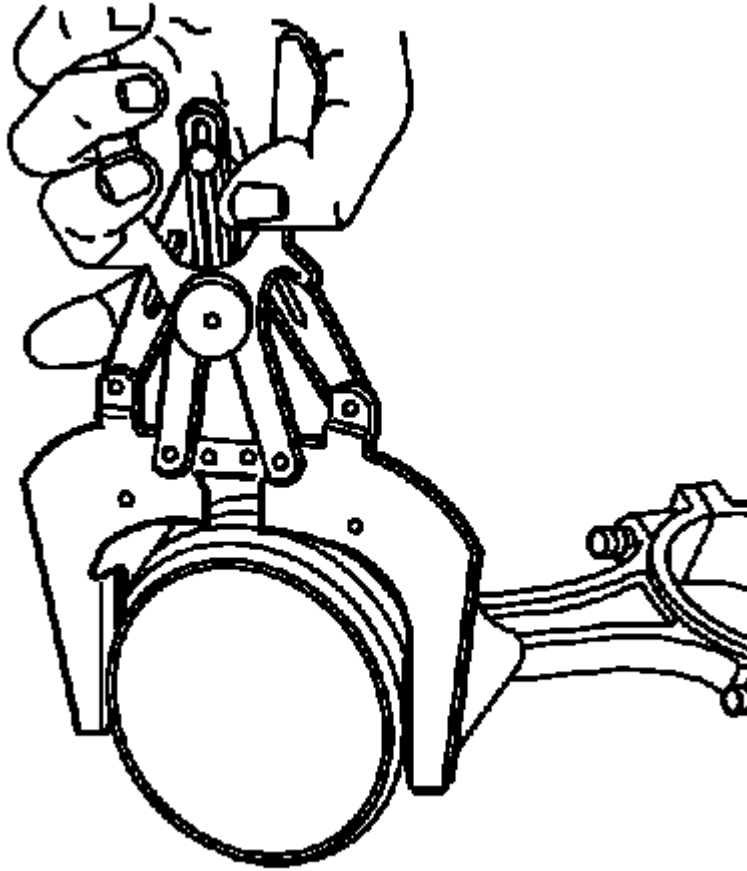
Cleaning The Piston Ring Grooves With Suitable Ring Groove Cleaning Tool
